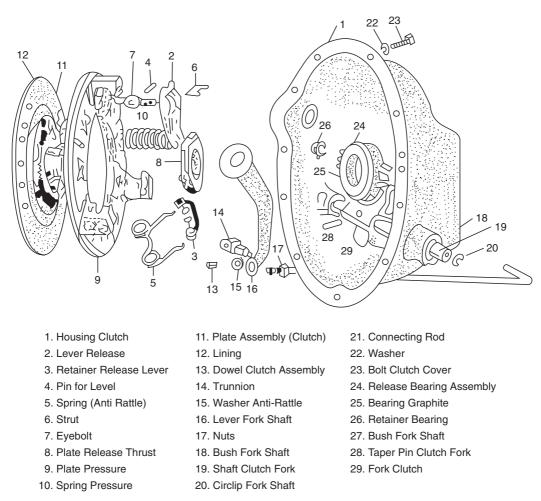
Components of Clutch (Courtesy: Hindustan Motors Ltd.)
